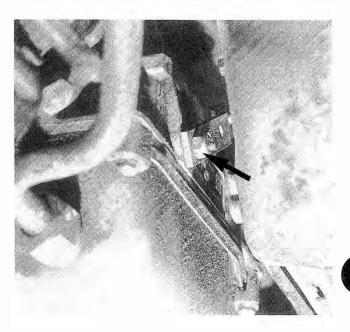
Manual valve lever and nut on transmission to be removed for replacement of seal.
